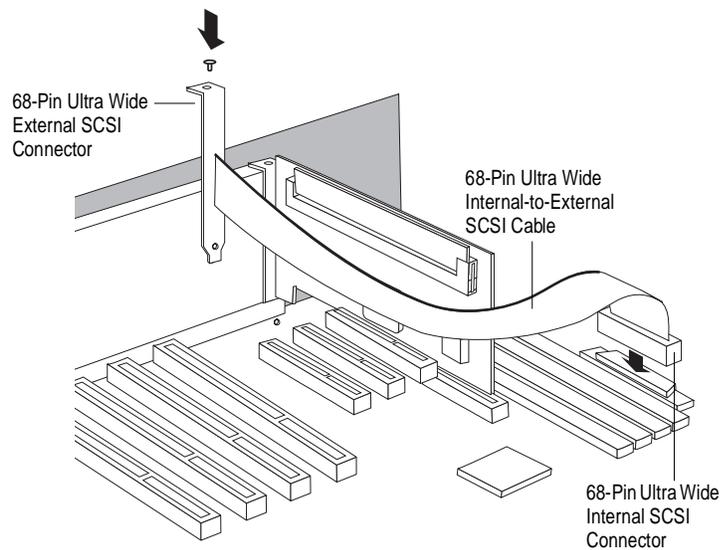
Installing an Internal-to-External SCSI Port Expansion Cable
